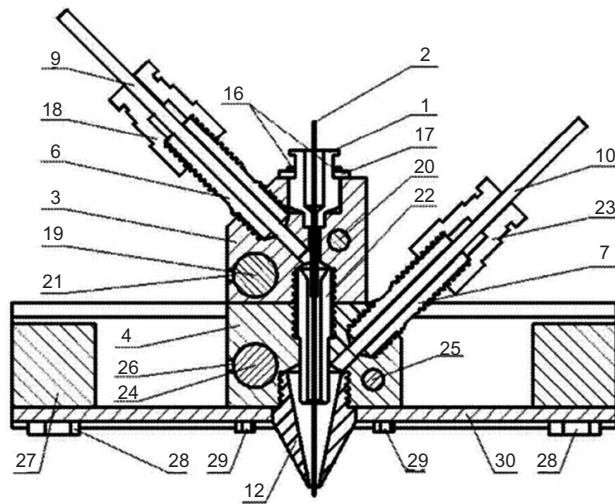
Design layout 3 for a multi-stage wire feeding print head [90].
